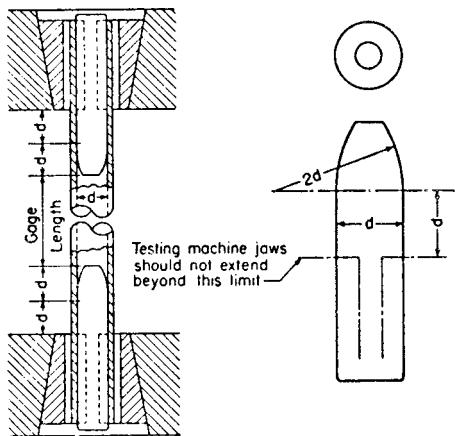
Metal Plugs for Testing Tubular Specimens, Proper Location of Plugs in Specimen and of Specimen in Heads of Testing Machine
